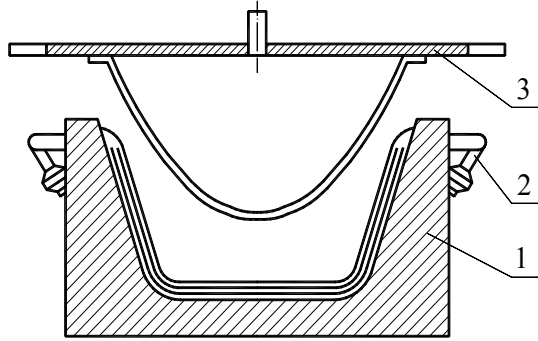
Pressing product using elastic diaphragm: 1 – form; 2 – stop bolts; 3 – upper plate; 4 – elastic diaphragm [own study]
